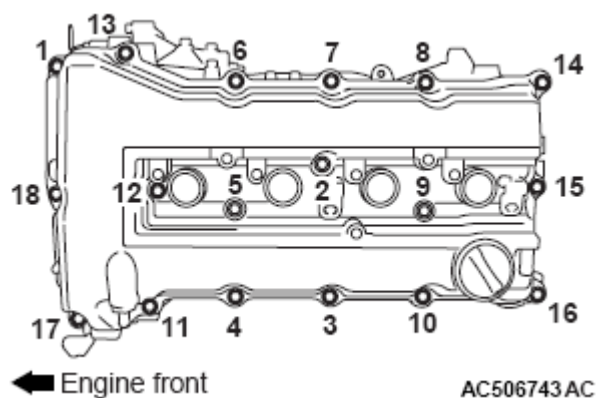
Identifying Tightening Sequence Of Rocker Cover Assembly Mounting Bolts
